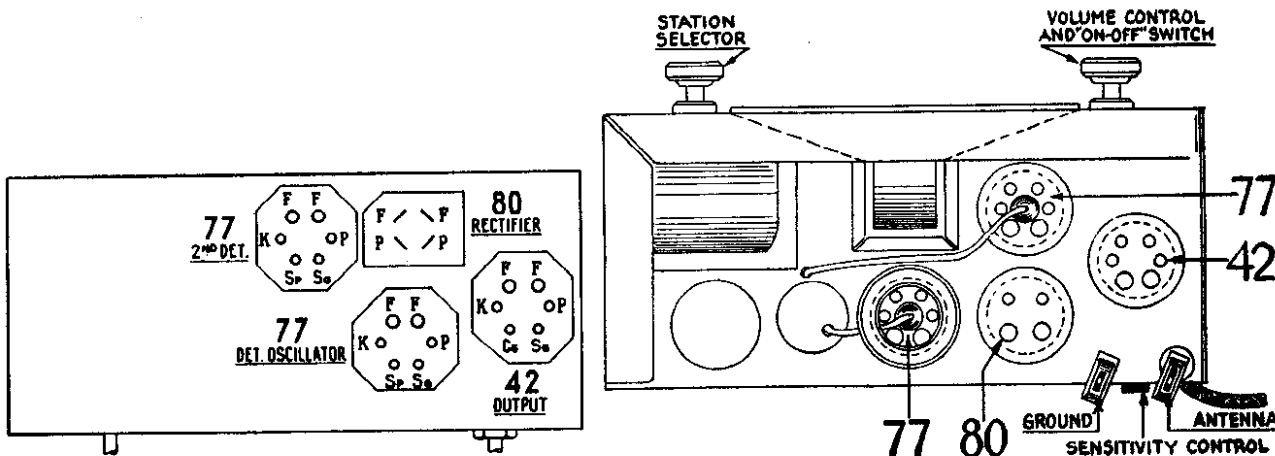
Tube Socket Layout (Viewed from Bottom)
